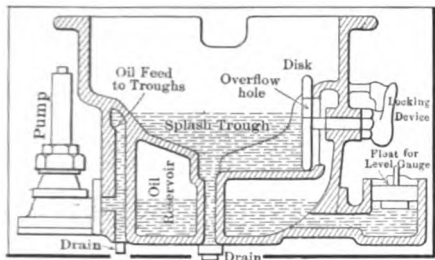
Sectional view of the Pullman crankcase showing the oil channels and drains
